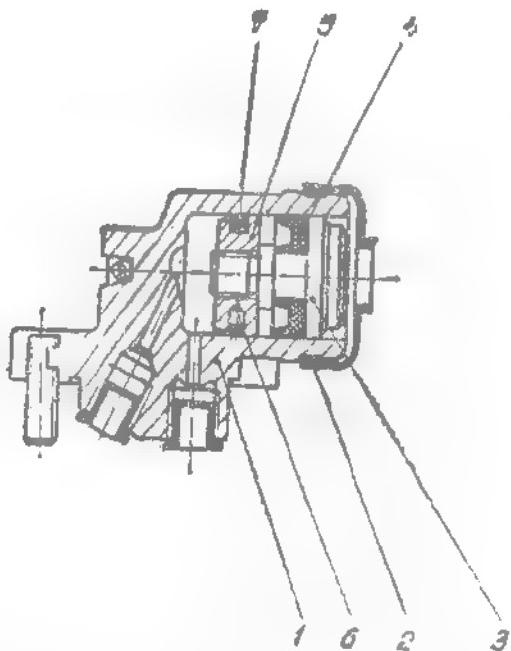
FRONT WHEEL BRAKE CYLINDER
